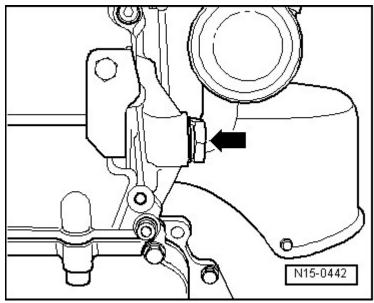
Identifying Cylinder Head Cover Bolts Courtesy of AUDI OF AMERICA, LLC
